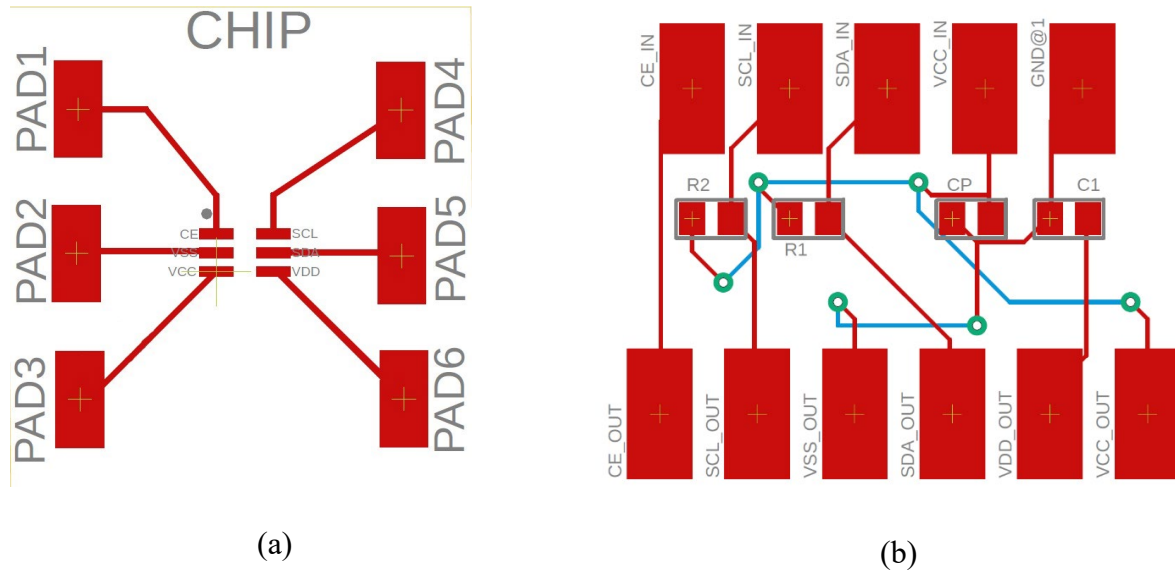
PCB layout of (a) Sensor board and (b) Controller Board
